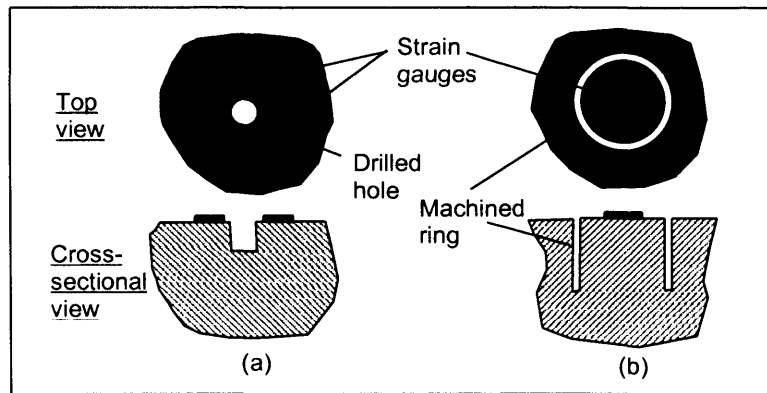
(a) Centre-hole-drilling technique (b) Ring-core technique
